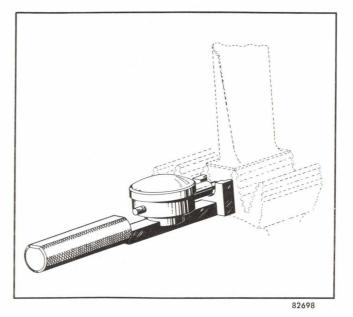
Turbine Blade Axial Location Gage No. 6010
